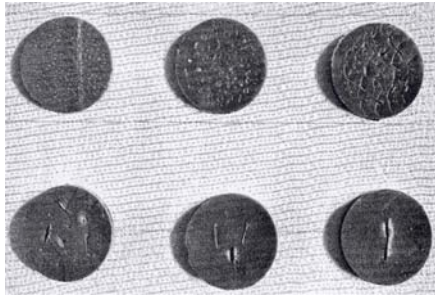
Cross section plot of cracked specimen⁽¹⁰⁾
